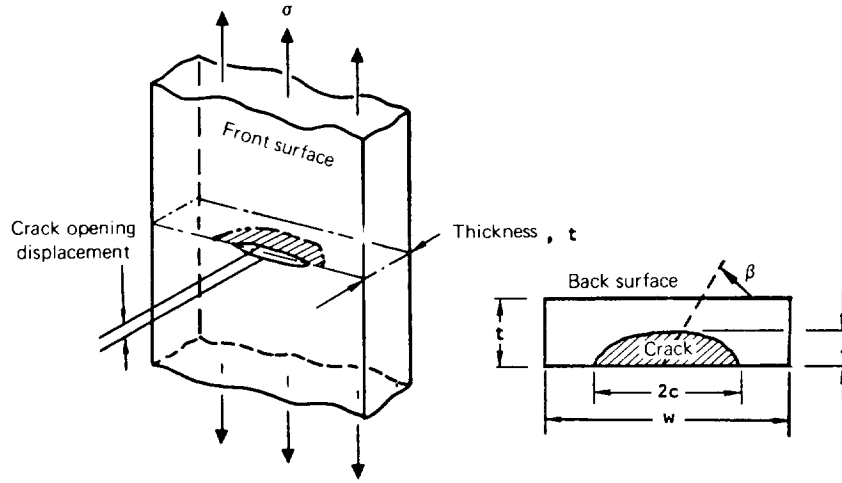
Sketch illustrating surface-crack model and nomenclature used in fracture-mechanics analysis (ref. 3).
